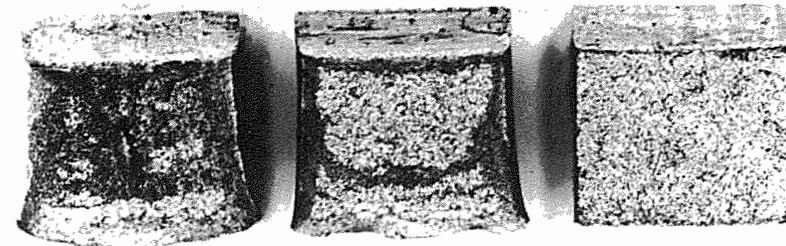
Combinations of fracture modes are shown by fracture surfaces of three impact test specimens which were broken at different temperatures. On the left, fracture is mostly shear; in the center, combined shear and cleavage; and on the right, cleavage. (Courtesy of D. J. Wulpi, International Harvester Company.)
